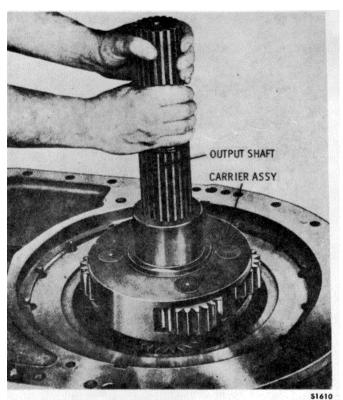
Removing Output Shaft and Low-Range Planetary Carrier Assembly
